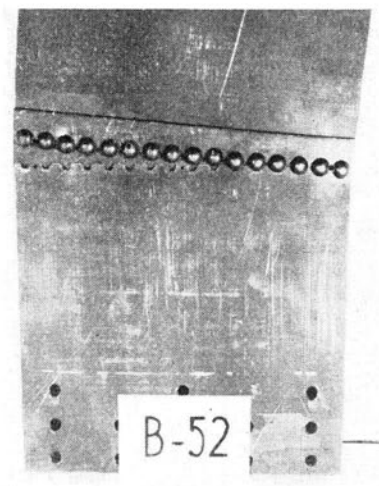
FAILURE BY SHEET TENSION; LAP JOINT WITH SINGLE ROW OF RIVETS, SPECIMEN B-52
